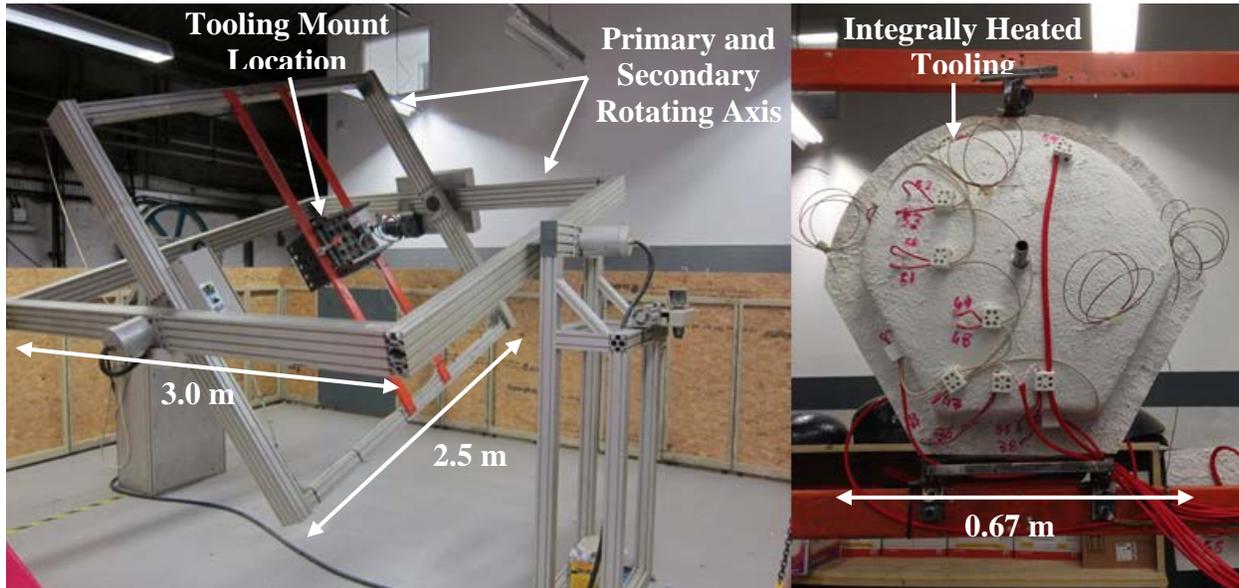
The biaxially rotating arms of the rotational moulding rig with the integrally heated tooling also pictured.
